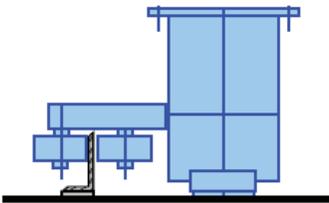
Traversing on concrete track, with 'L' shaped guide rail
